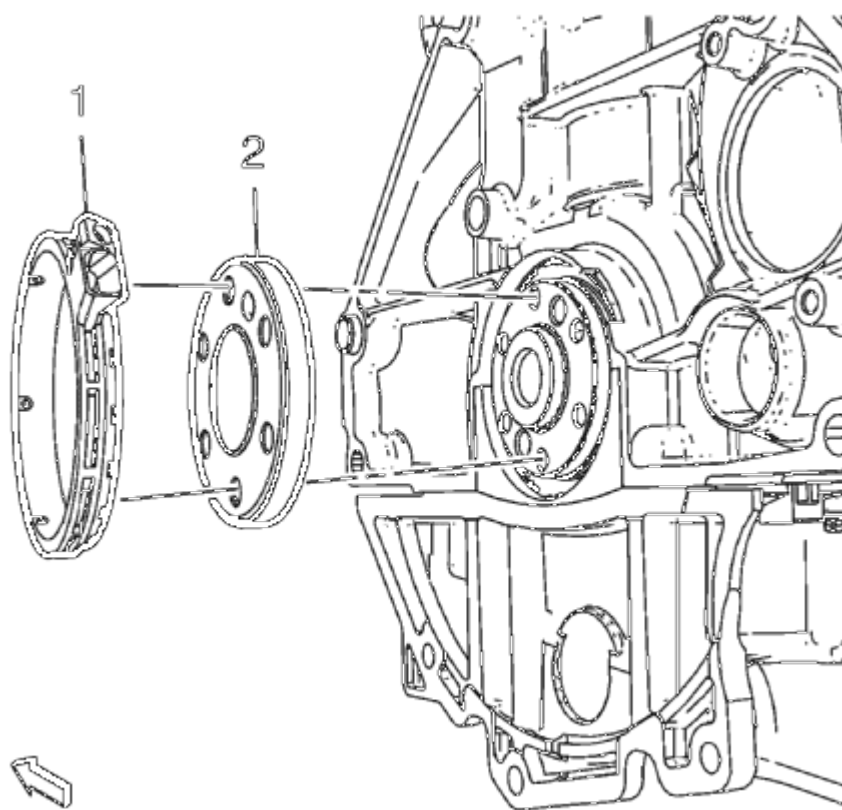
Crankshaft Position Sensor Reluctor Ring And Oil Seal Housing
